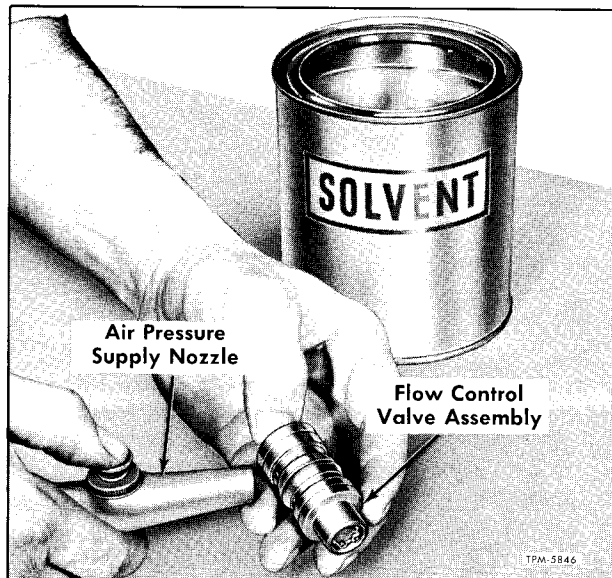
Cleaning Flow Control Valve Using Air Pressure
